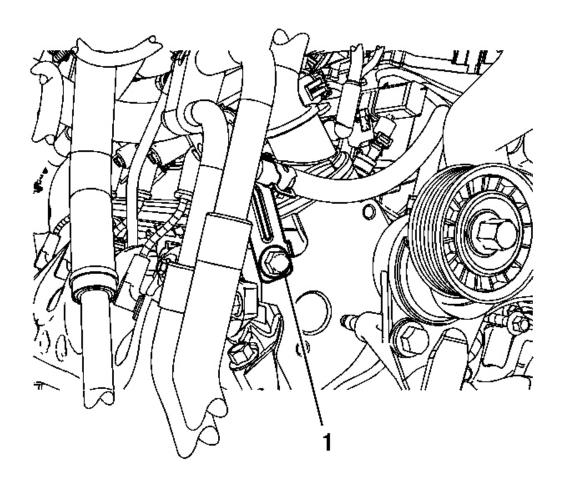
Heater Hose Bracket Bolt Courtesy of GENERAL MOTORS CORP.
